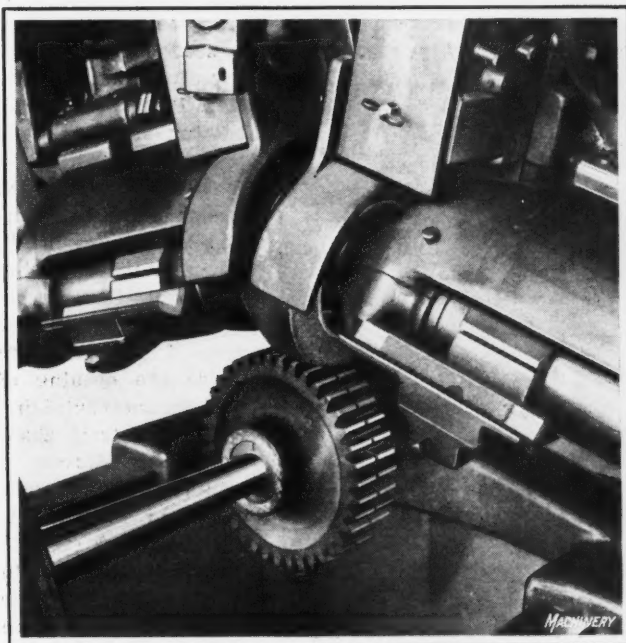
Detail View of Grinding Wheels on Machine shown in Fig. 10
